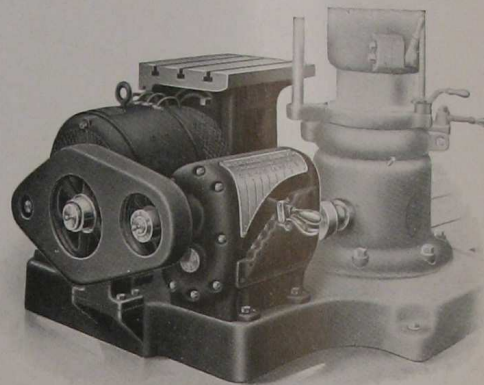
Constant Speed Motor Drive thru Speed Box.
